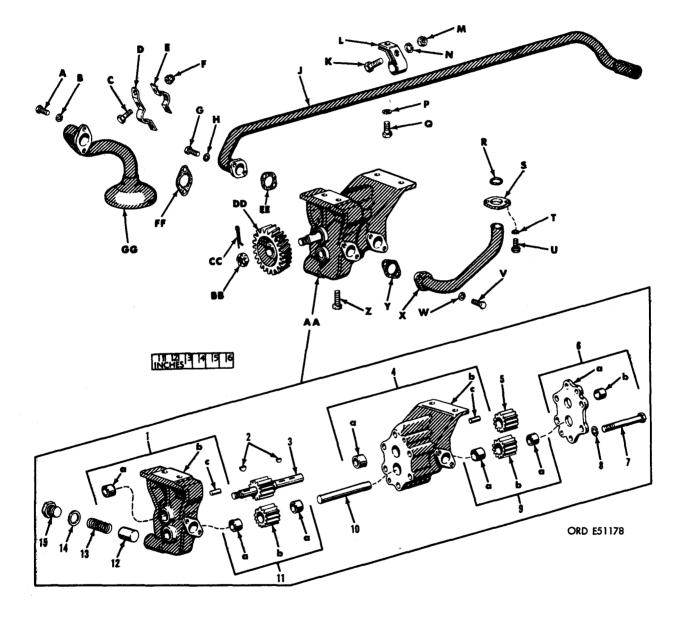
OIL PUMP ASSEMBLY AND RELATED PARTS - EXPLODED VIEW.
